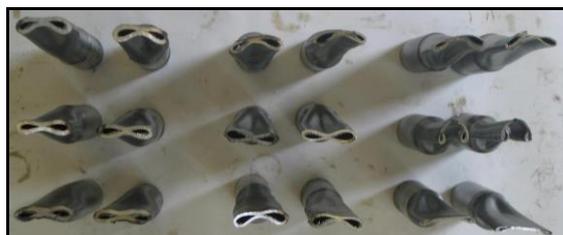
Sectioned test specimens made of 10MoCr10 steel
